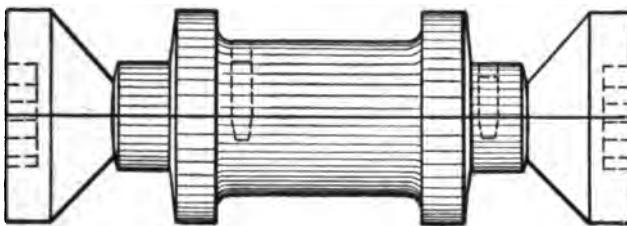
Split Bushing Pattern Ready to Take from Lathe
